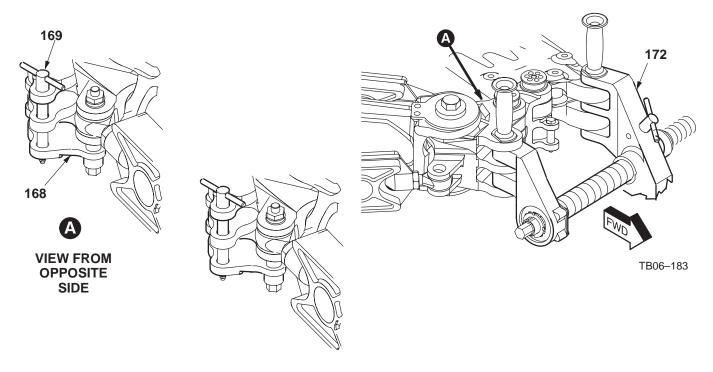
L/H FWD Swing Llnk and Blade in Folded Position
